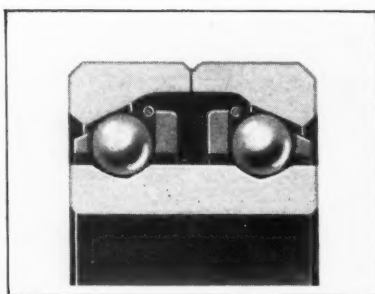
Precision Ball Bearings Used on the Boring Spindles
